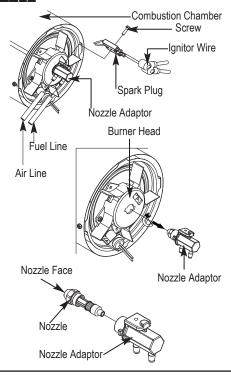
Nozzle Replacement For Models CP045CK-CP175DK
